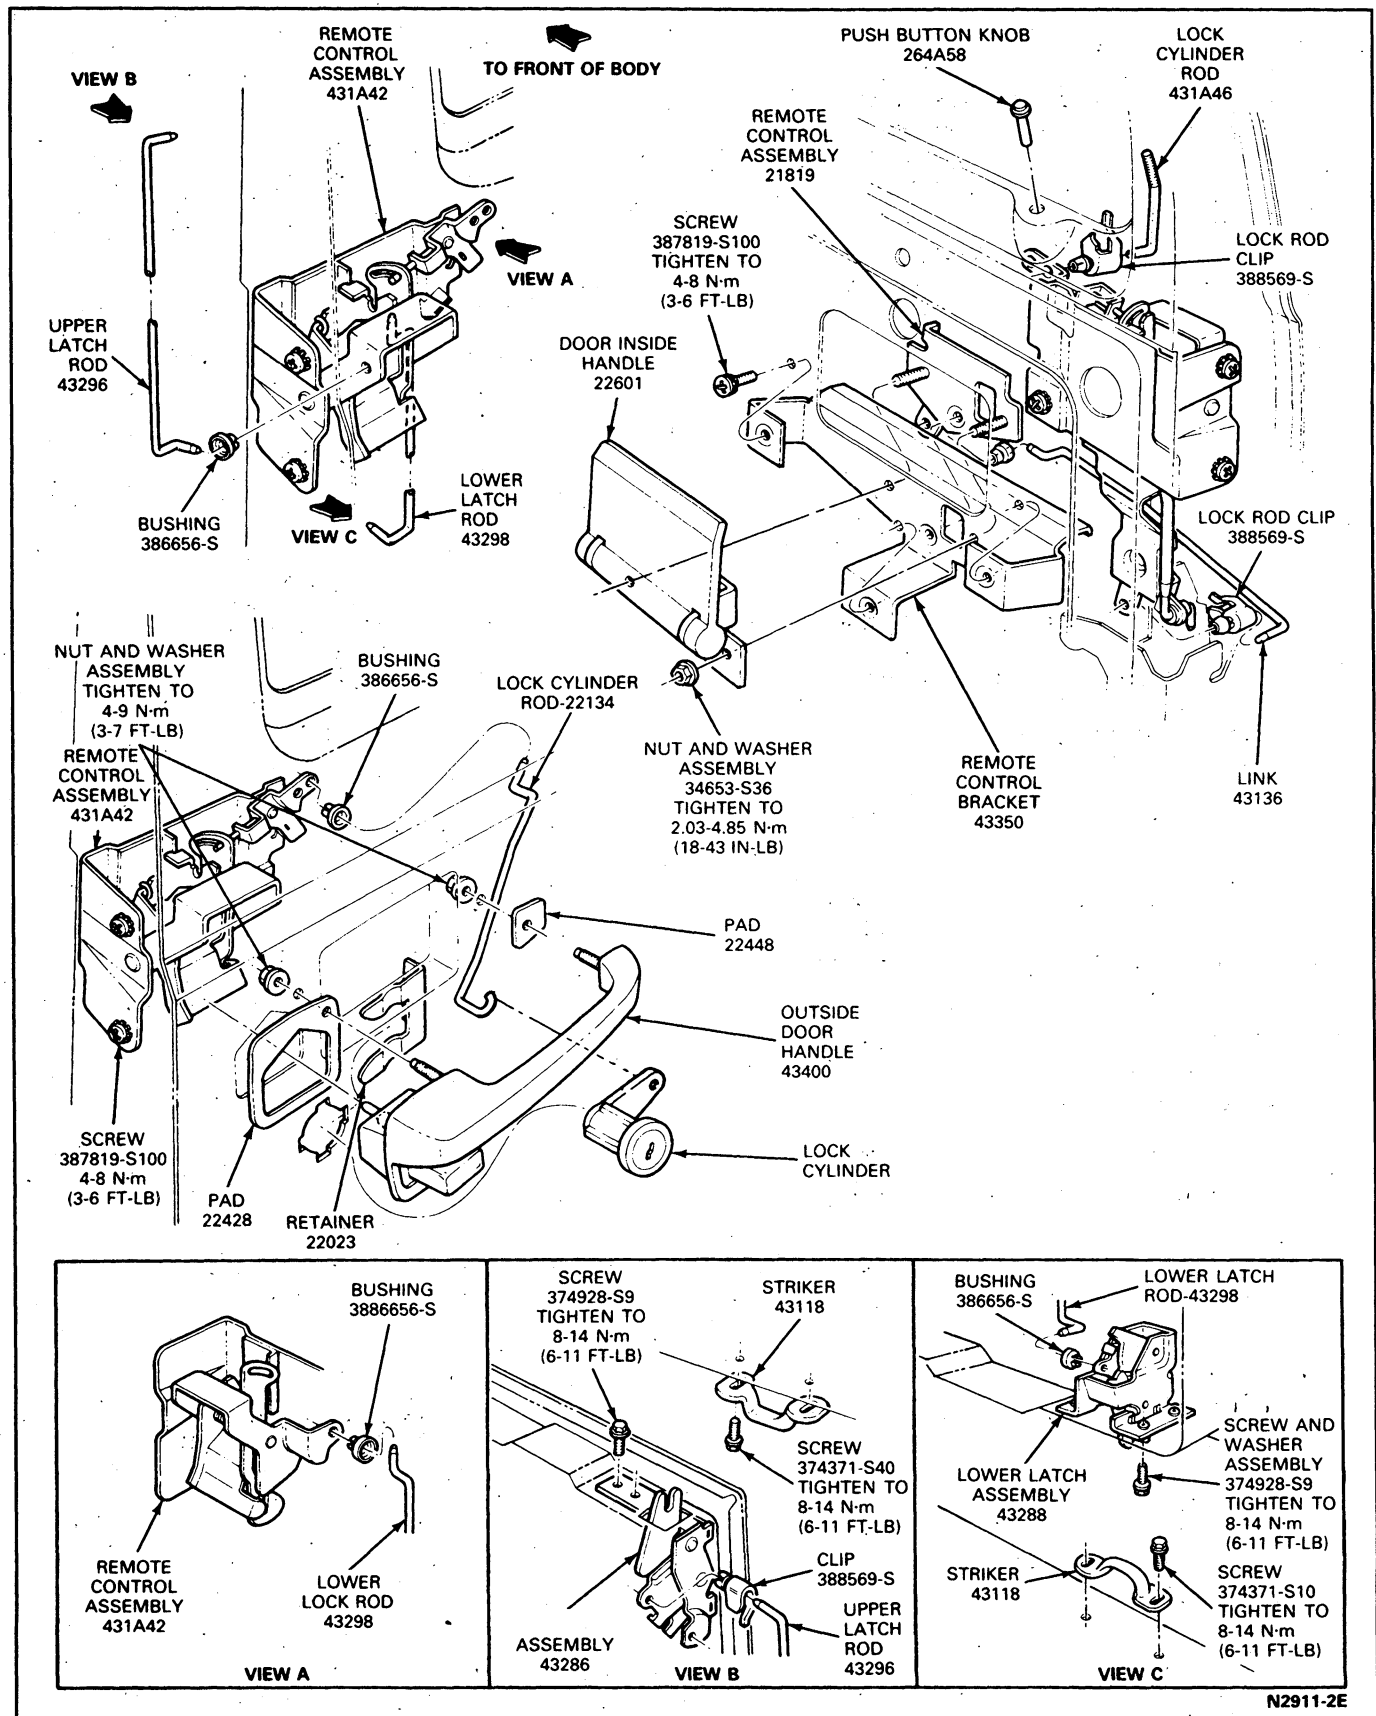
Right Rear Door Latch and Remote Control Installation—E-150—E-350
